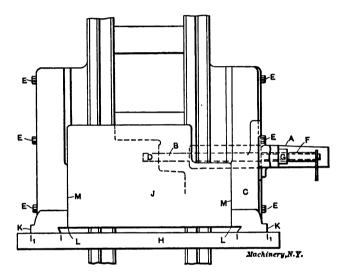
Method of Setting the Housings. First the Front Housing is set for Alignment of Driving Shaft Bracket A; then the Back Housing is brought into the Same Flane by means of Straightedge H
